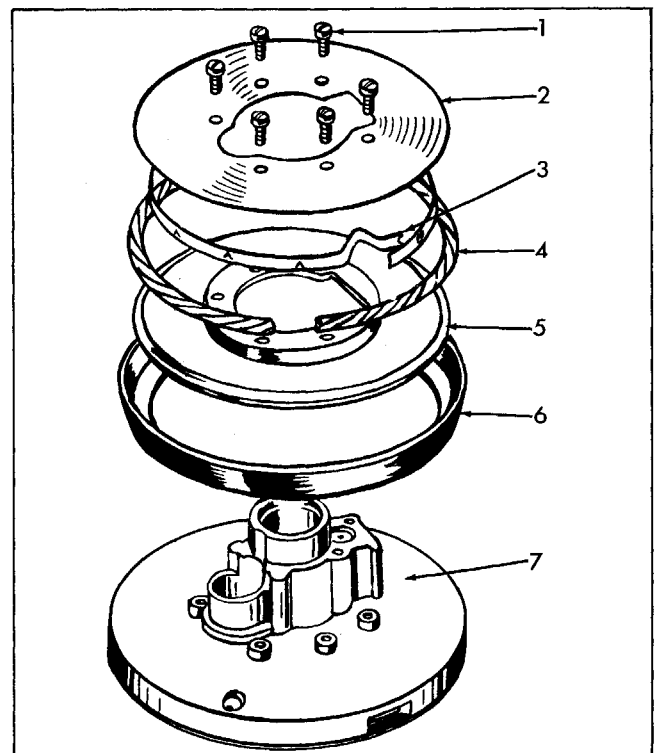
Removal of Packing and Plates from Rear Piston Plate
